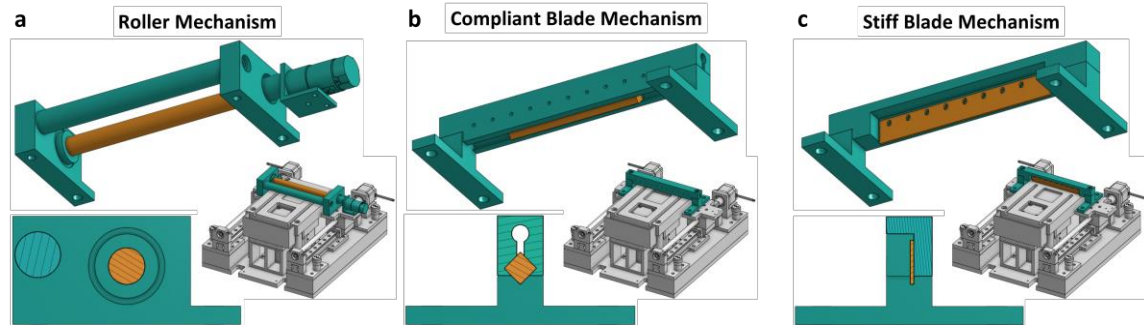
Designs of various powder spreading mechanism configurations for testbed shown in assembled machine configuration, mechanism close-up, and side-view: (a) motorized roller, (b) compliant blade, (c) stiff blade.
